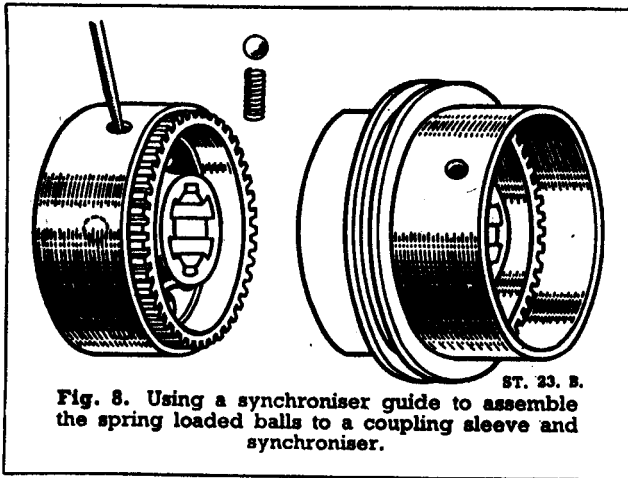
Using a synchroniser guide to assemble the spring loaded balls to a coupling sleeve and synchroniser.
